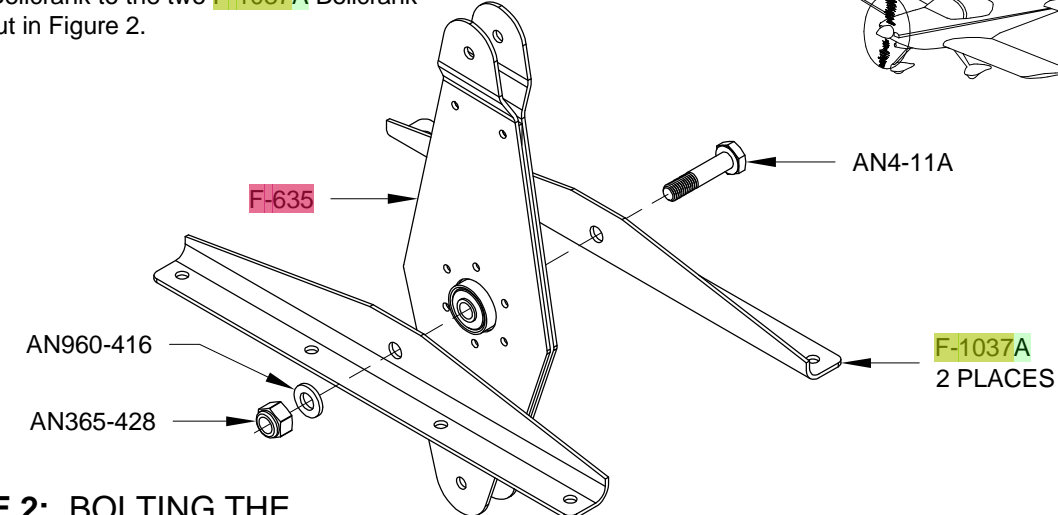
BOLTING THE ELEVATOR BELLCRANK
